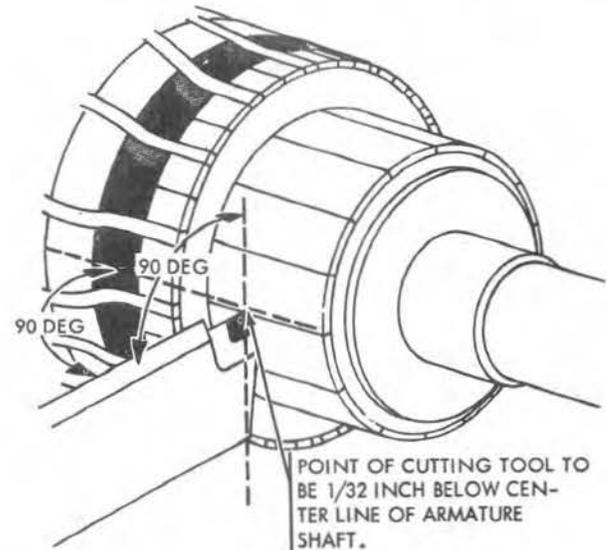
PROPER POSITION OF CUTTING TOOL.
